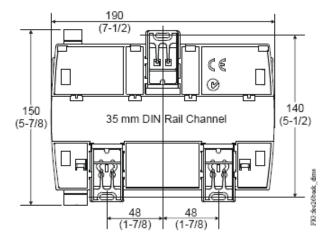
Back of FEC26 Controller Showing Extended Mounting Clips, DIN Rail Channel, and
